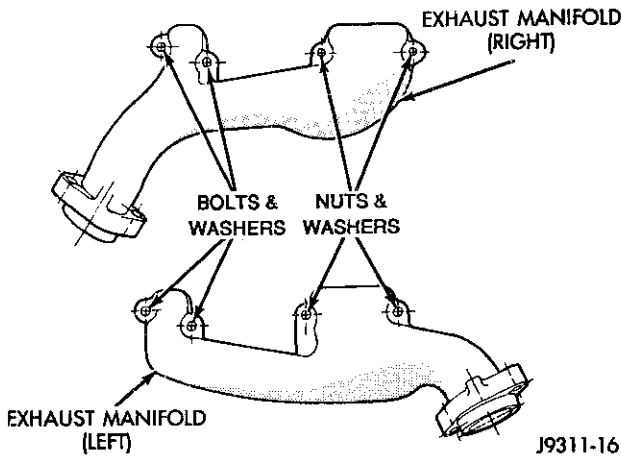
Engine Exhaust Manifold Installation—3.9L Engine
